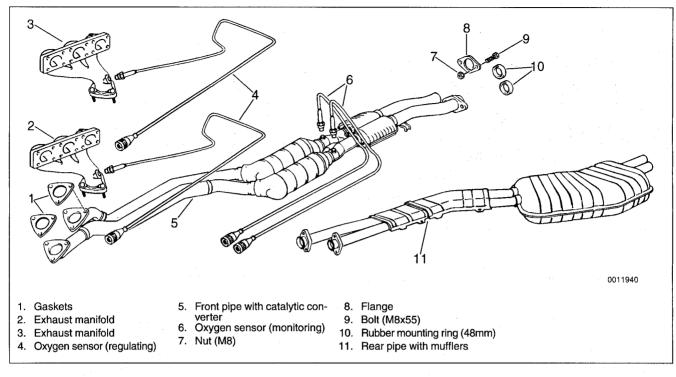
Exhaust system on 1996–1998 6-cylinder engines. M3 (S50US) exhaust system shown.
